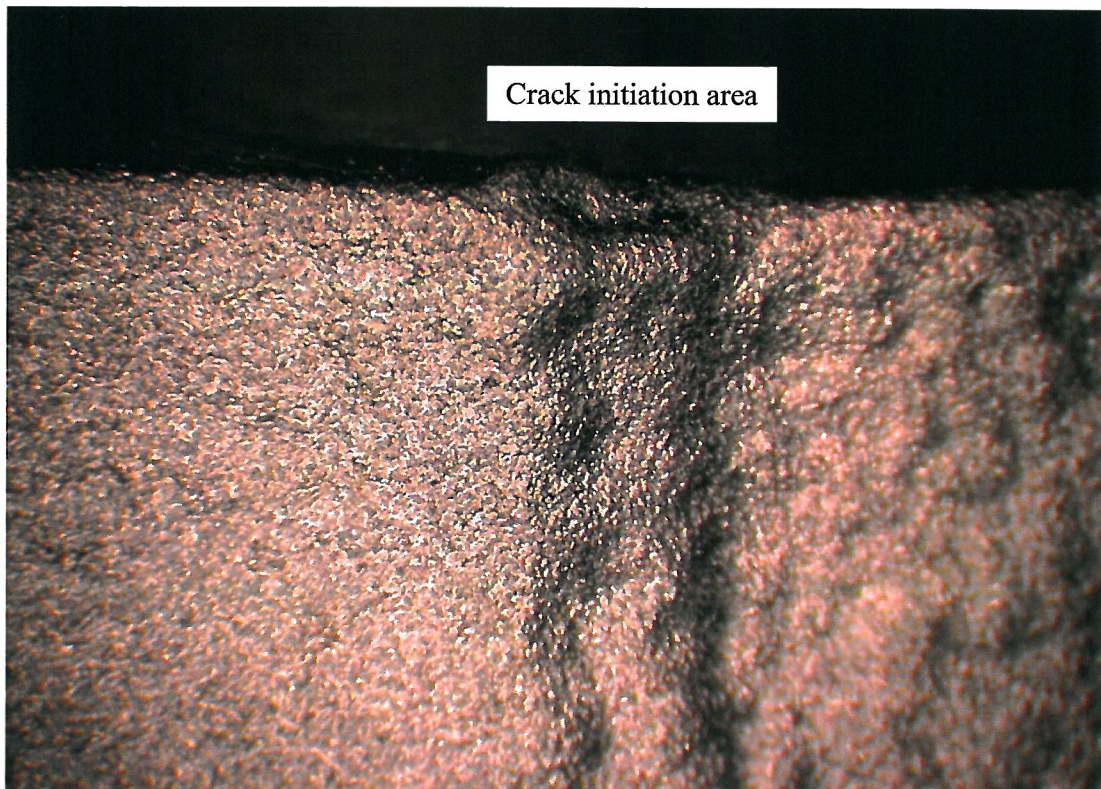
Image of component surface towards the crack initiation area after paint removal.
